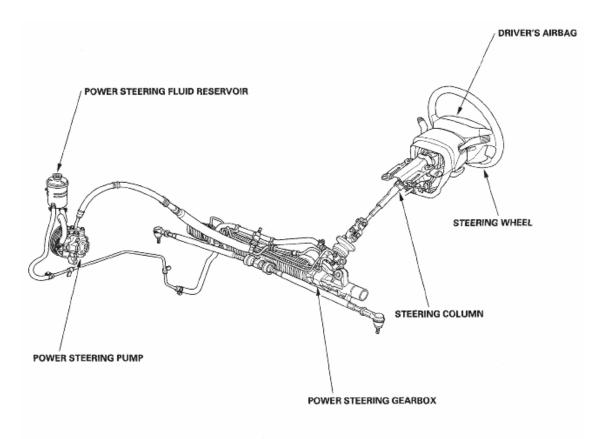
Identifying Power Steering Component Location Courtesy of AMERICAN HONDA MOTOR CO., INC.
